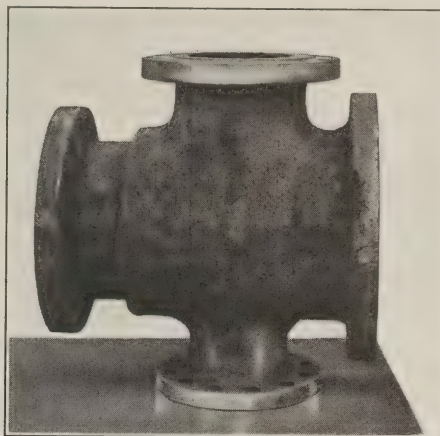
12 IN. BY 10 IN. BY 8 IN. BY 6 IN. EXTRA-HEAVY CAST IRON FITTING IN USE WITH SUPERHEATED STEAM, 1903-1908
